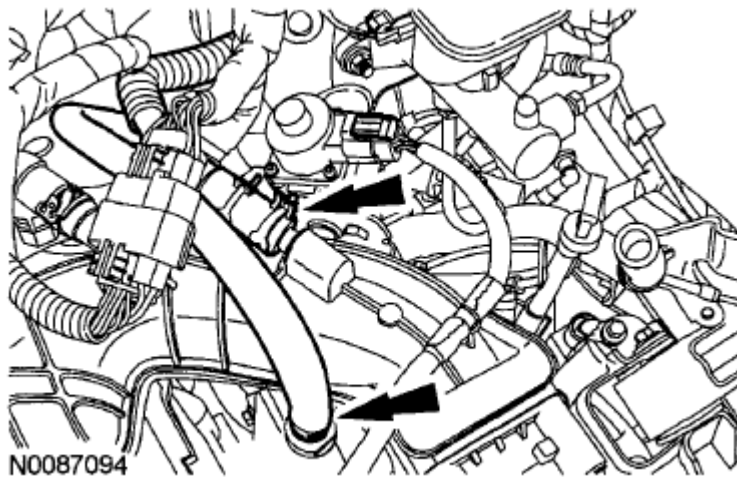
Locating Evaporative Emission (EVAP) Canister Purge Valve Tube And Brake Booster Vacuum Tube
